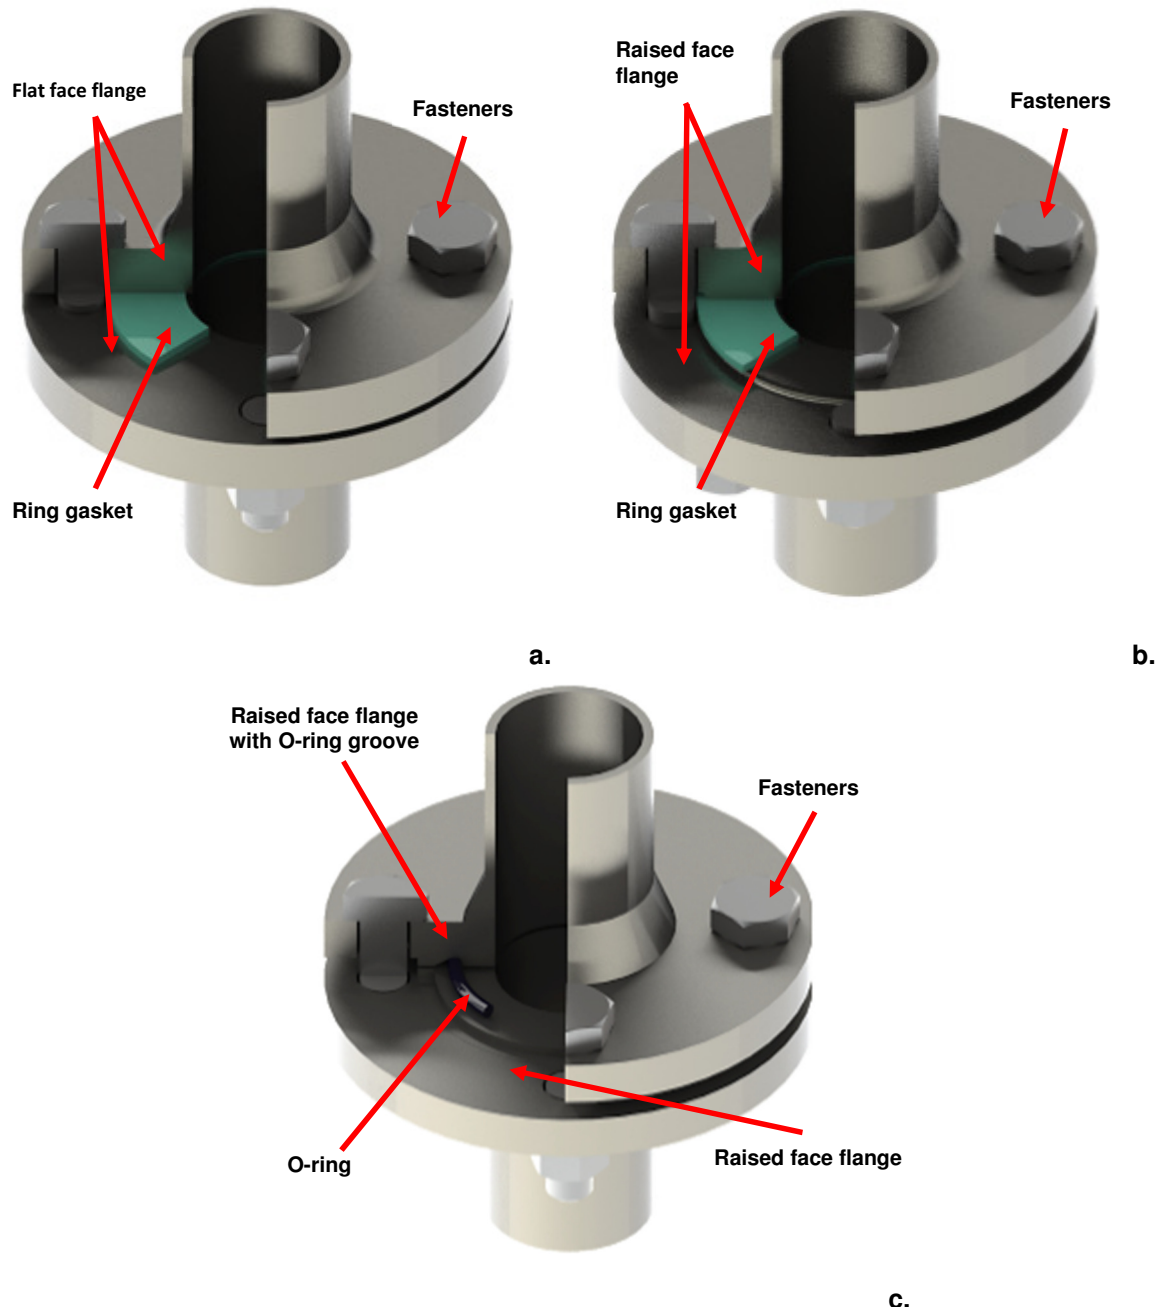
The different types of connections considered: (a) flat face (b) and raised face flanges with ring gaskets; and a (c) raised face flange modified to contain an O-ring
